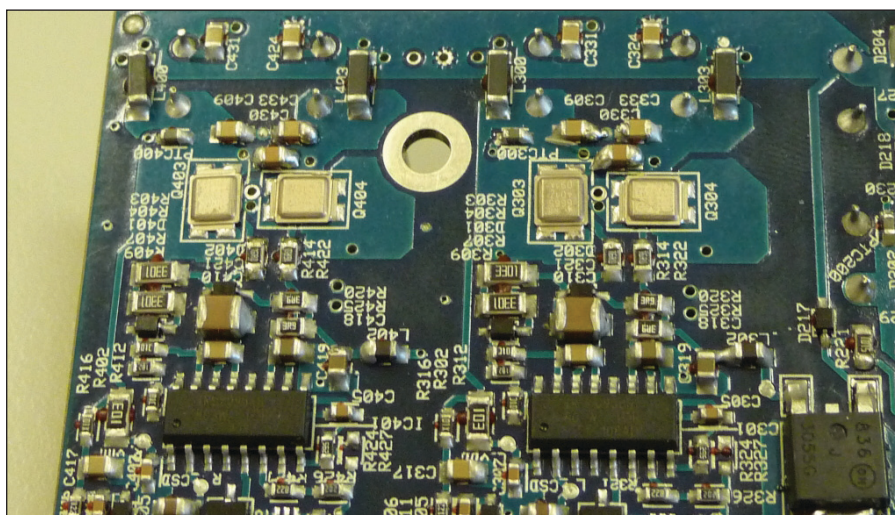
Output stage section ALC0180-2300 board using no heatsinking whatsoever
